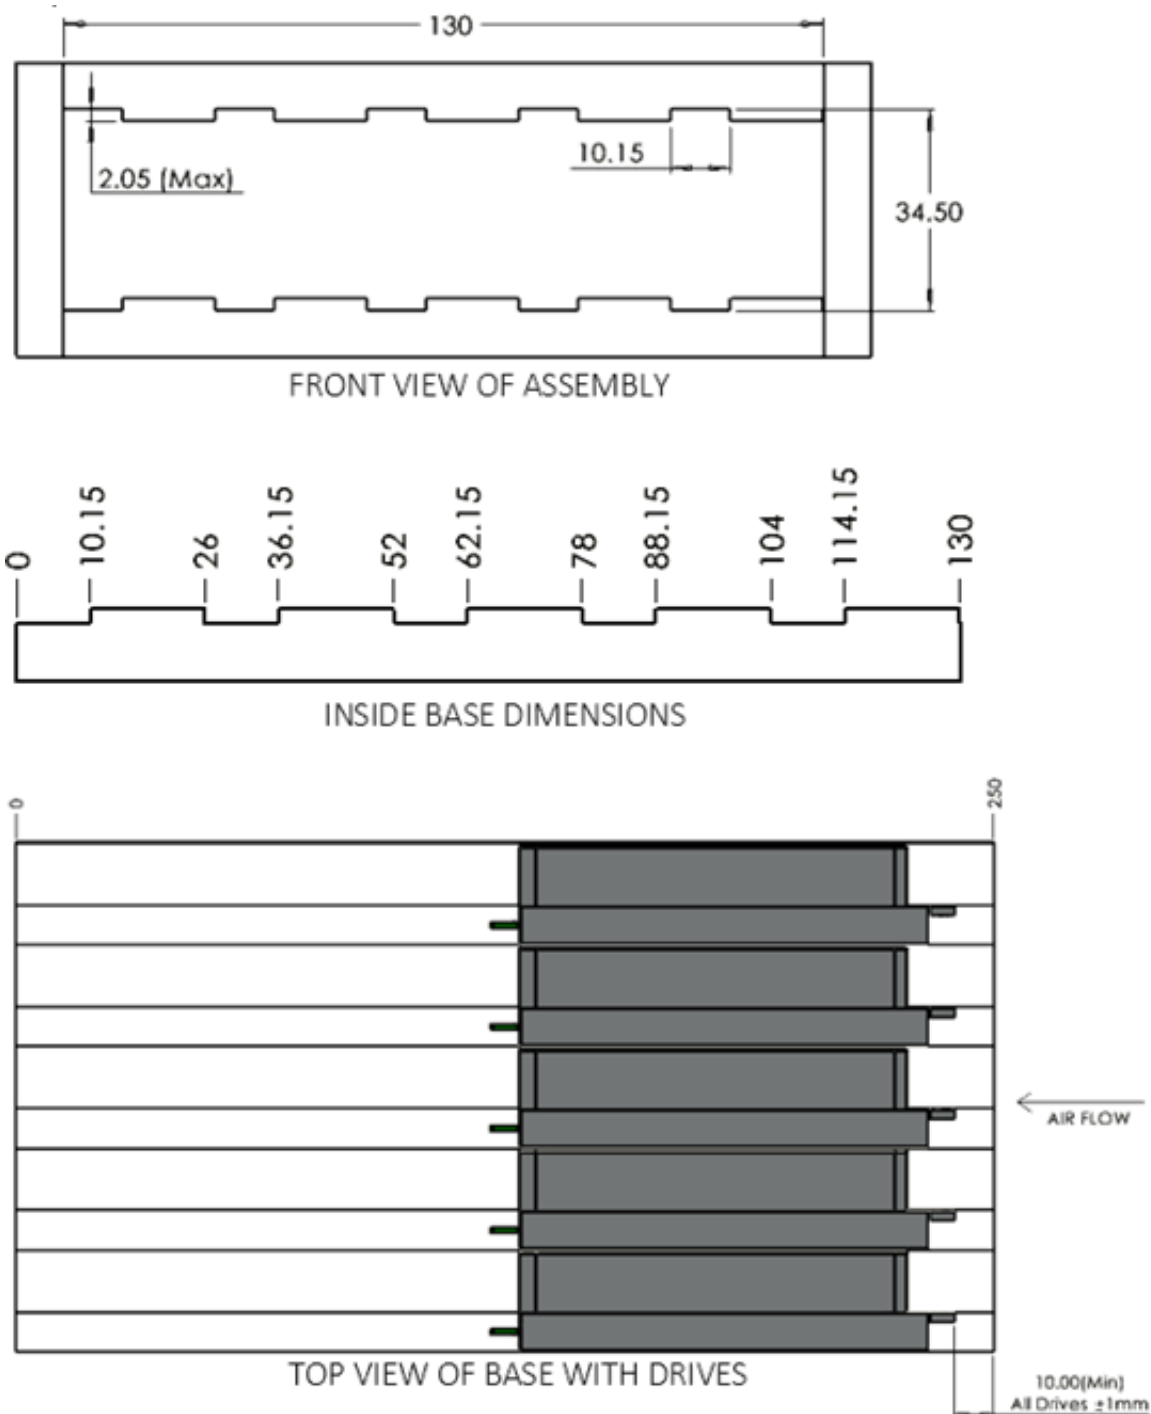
Required Dimensions of E1.S 9.5mm Test Fixture
